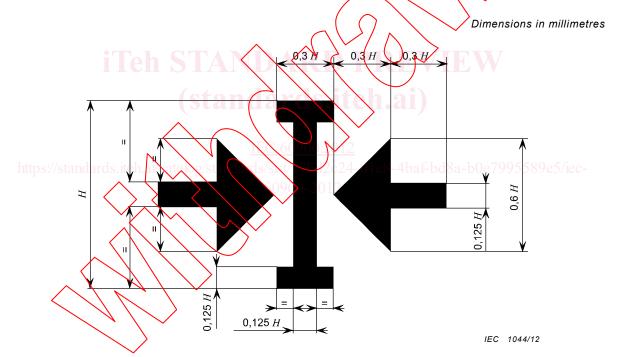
Marking symbol for hand tools capable of being assembled and designed to be interchangeable between different manufacturers
